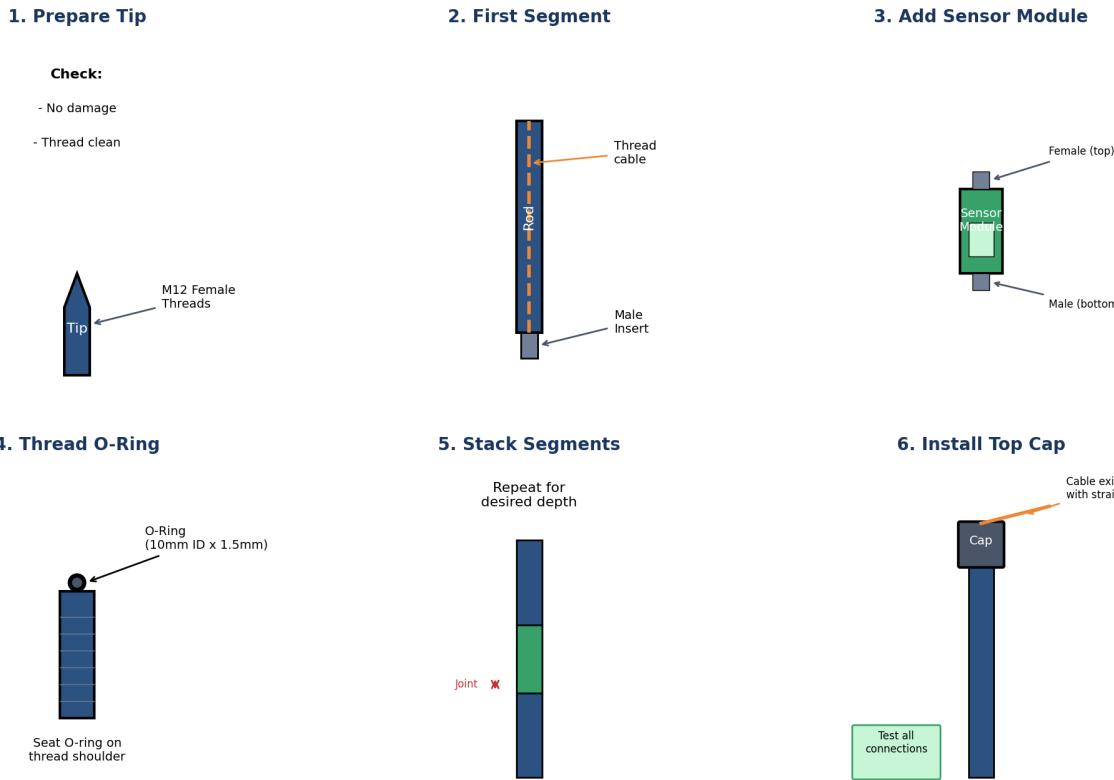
Six-step assembly sequence: (1) Prepare probe tip, (2) Thread cable through first segment, (3) Add sensor module, (4) Seat O-ring on thread shoulder, (5) Stack additional segments, (6) Install top cap with cable strain relief.
